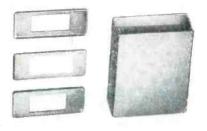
Component parts of culput window assembly for rectangular waveguide section that is brazed to tube
